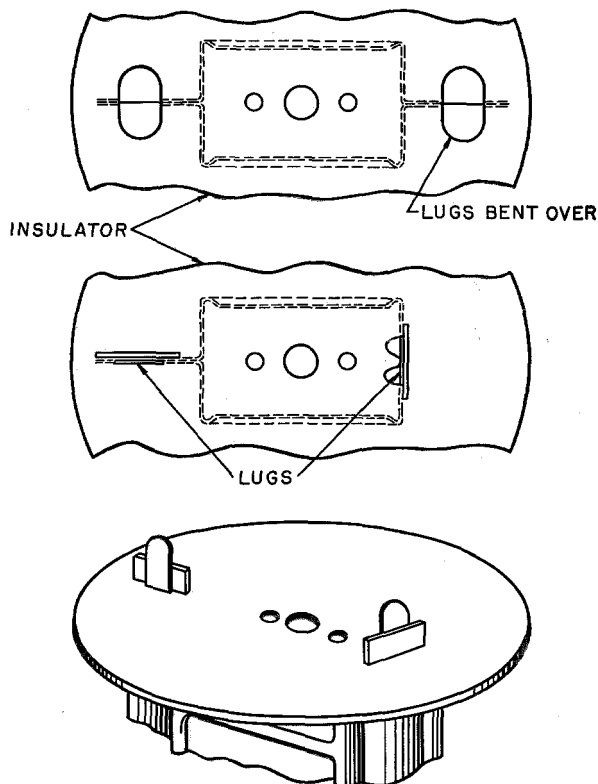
The upper drawing shows the old form of inserting two lugs through the insulator and bending them over to secure the anode. The lower two figures show the new method of putting the lugs at right angles and welding the locking strap to the lug.
